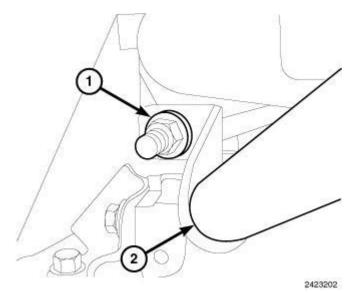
Coolant Outlet Tube Bracket Nut Courtesy of CHRYSLER GROUP, LLC
